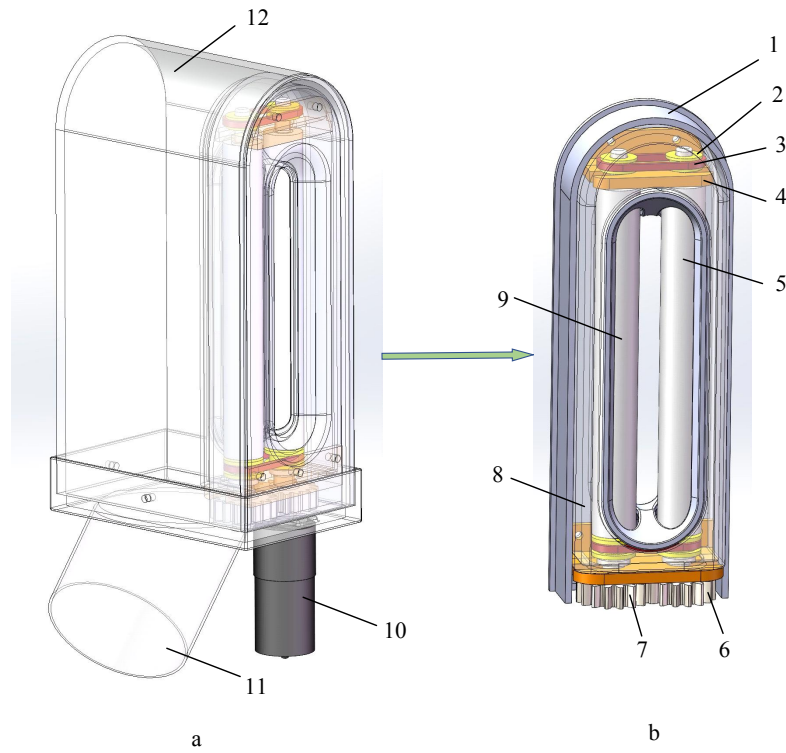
Schematic diagram of the air-suction double-roller harvesting device. Whole (a) and part (b) view. 1. Air-suction plate; 2. pulley; 3. tension belt; 4. support frame; 5. driven roller; 6. driven gear shaft; 7. driving gear shaft; 8. protective casing; 9. driving roller; 10. DC reduction motor; 11. handle; 12. outer housing.
